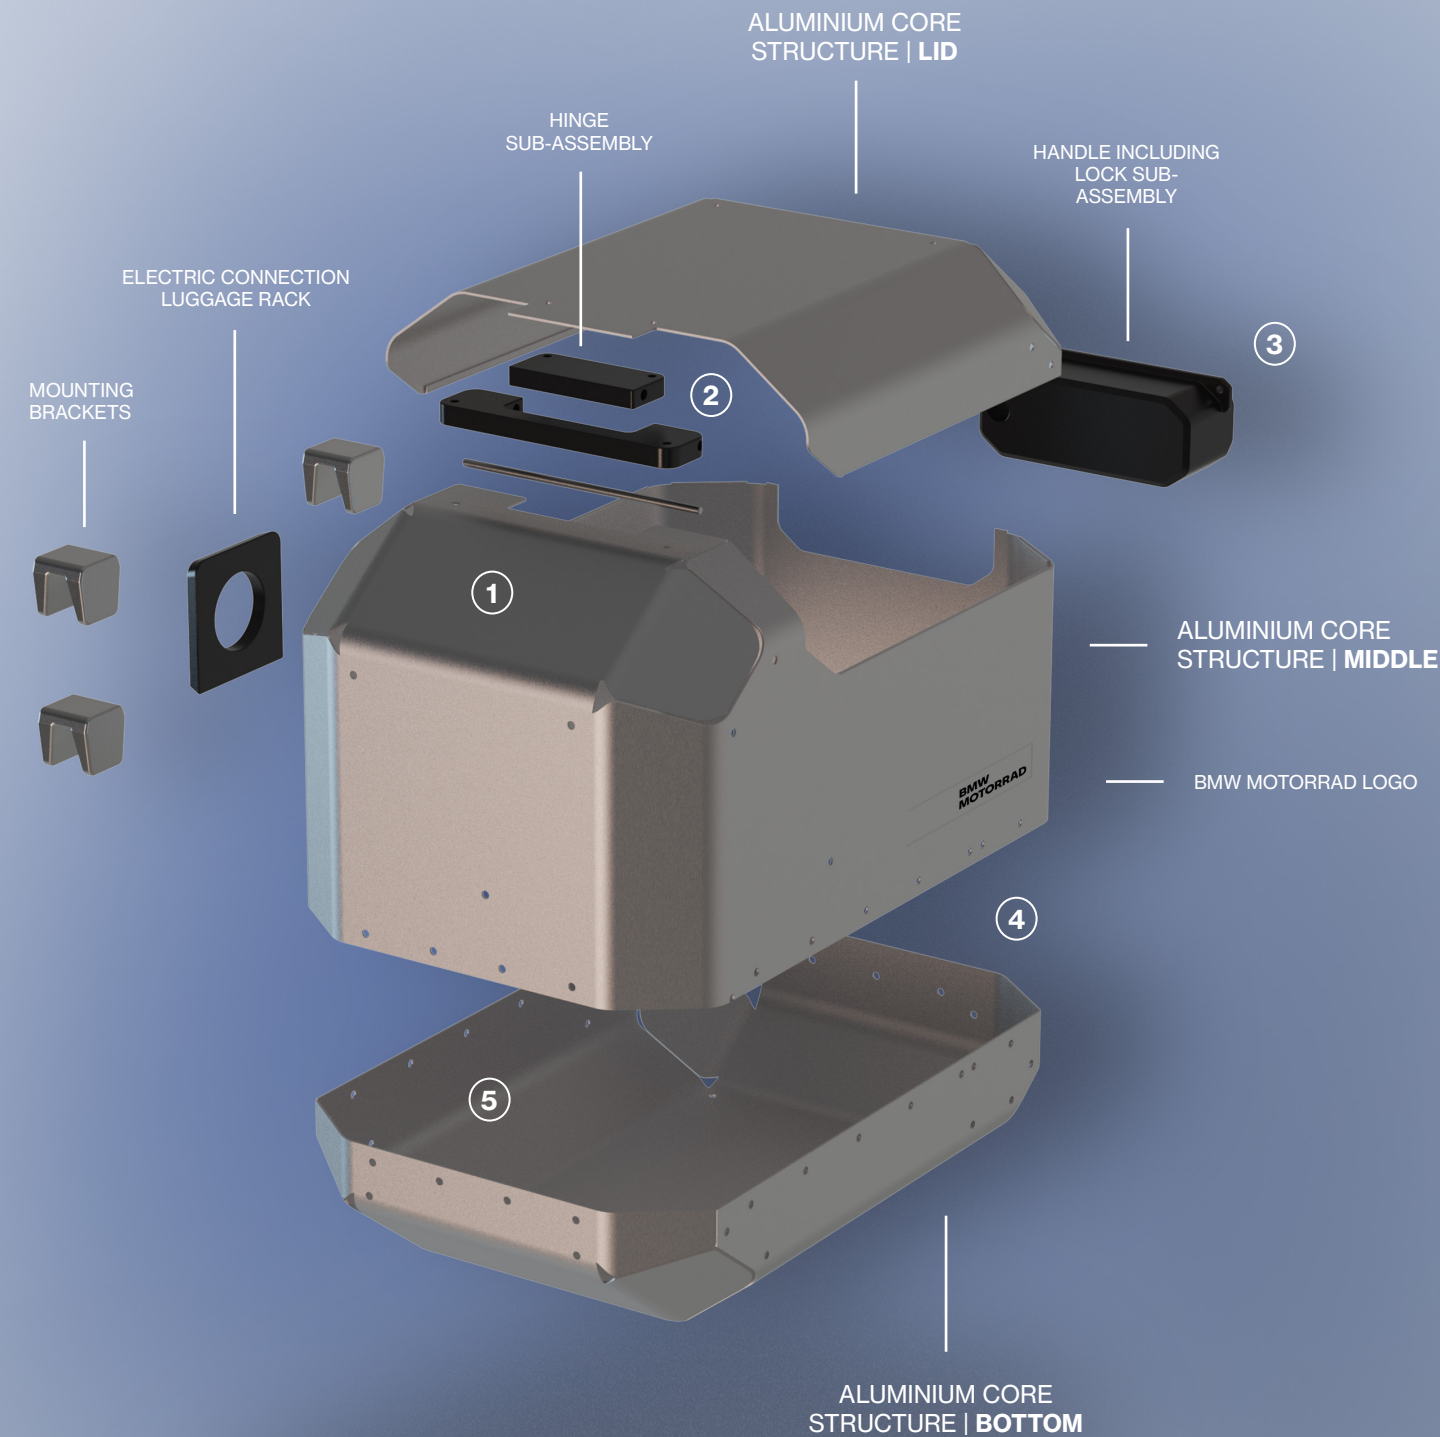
| Exploded view GS Proterra aluminium core structure including features.
